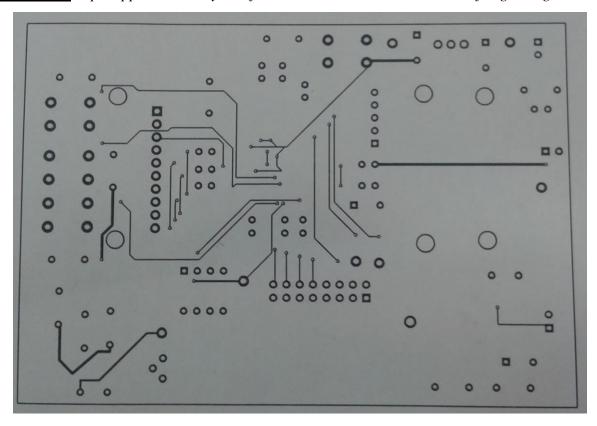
Bottom Copper ONLY layout of our PCB board. This can be used for grading
